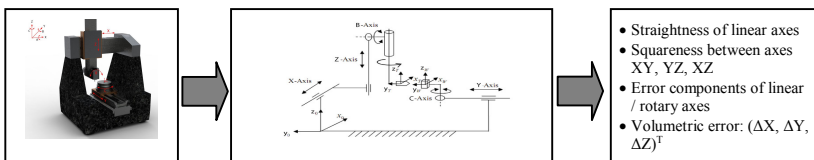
Schematic of the 5-axis Ultra-Mill and its machining errors
